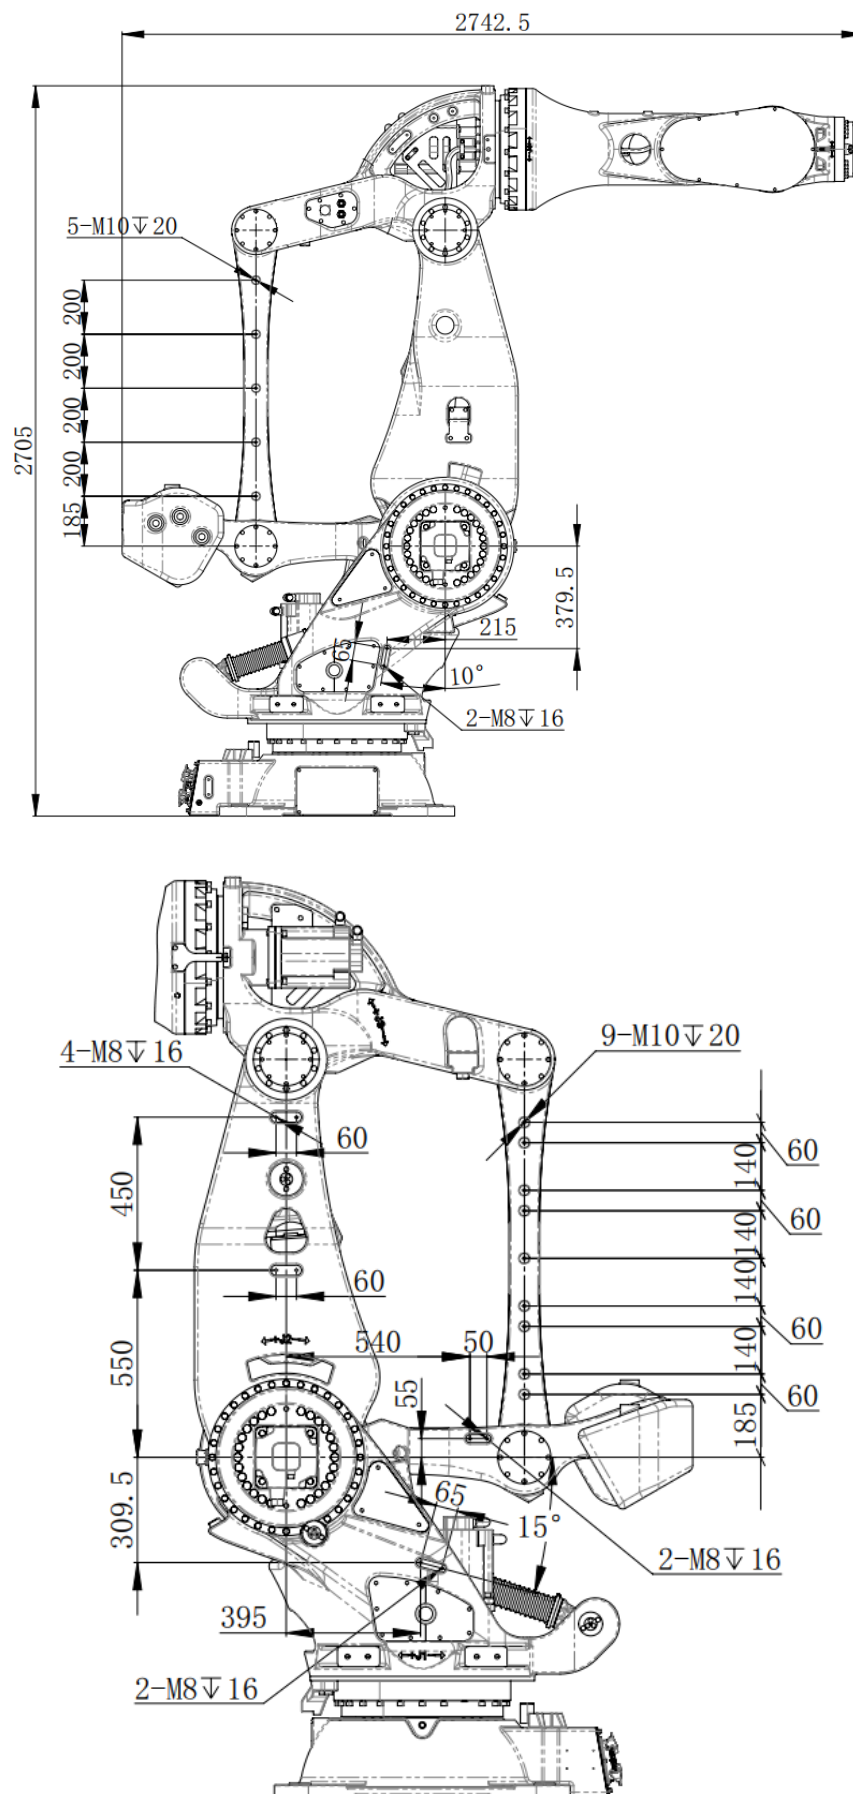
Equipment mounting face (ER600-2800, ER700-2800)
